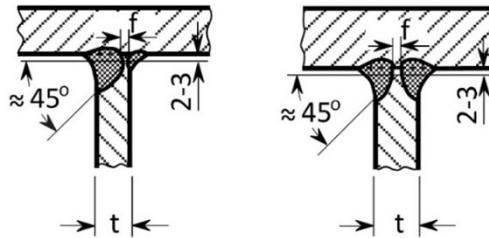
Single and double-bevel welds with defined incomplete root penetration
